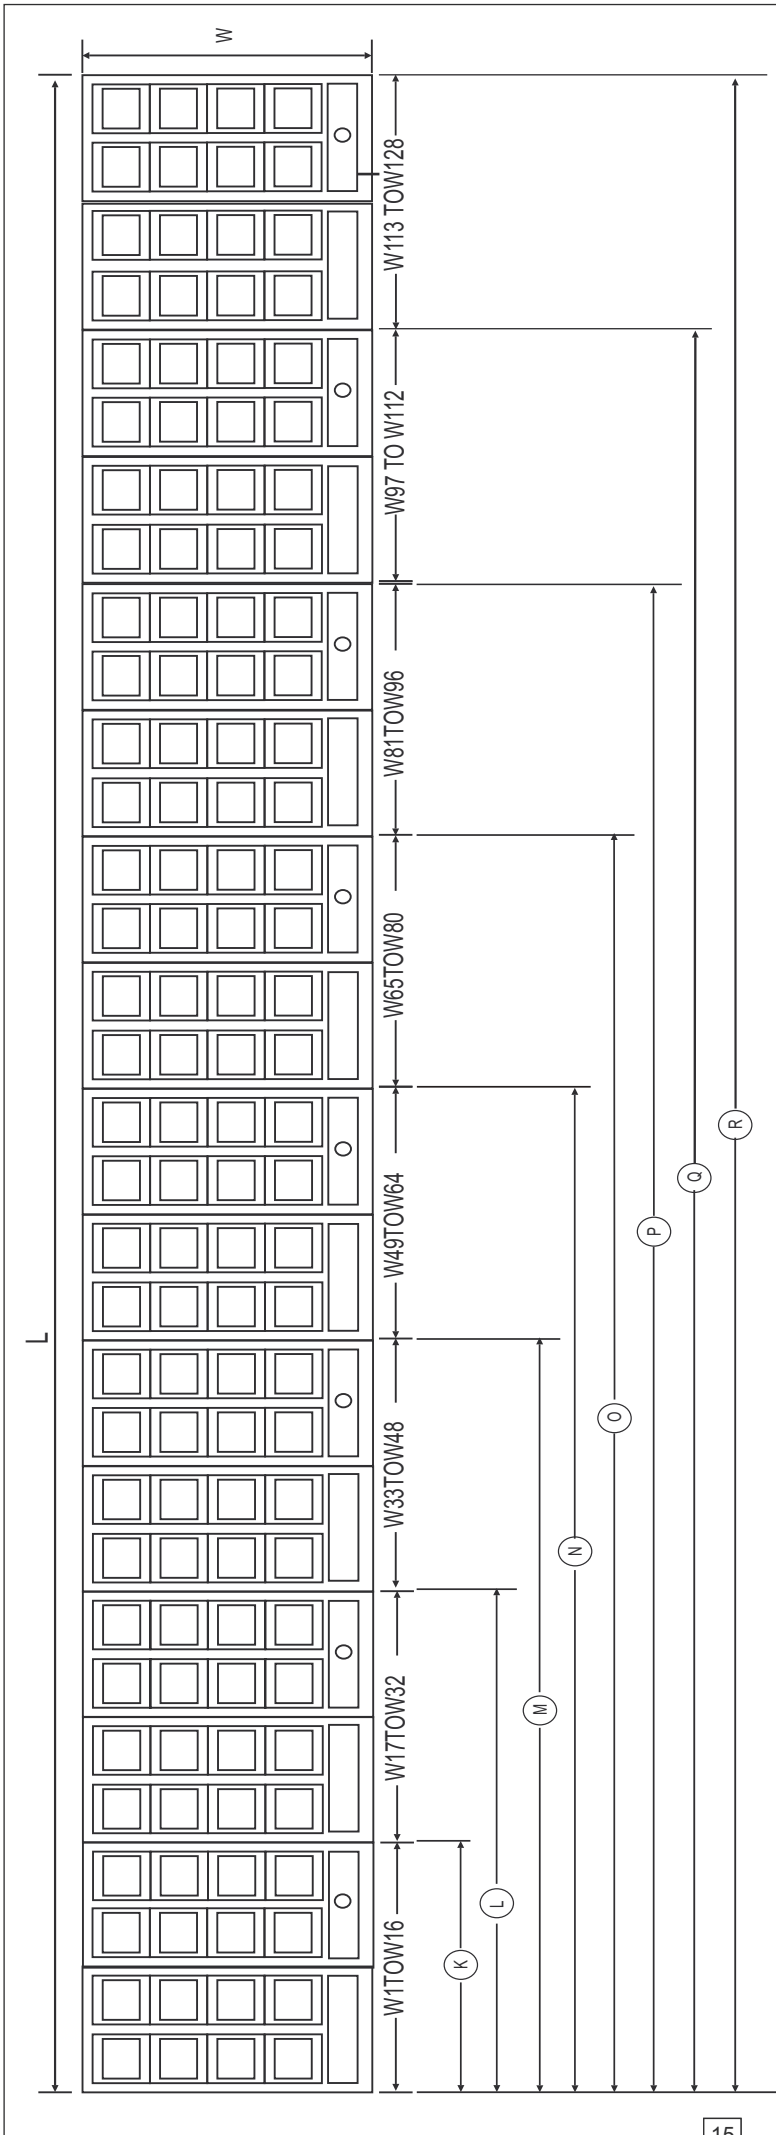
GENERAL ARRANGEMENT & DIMENSIONAL DETAILS – MCU & PSU
